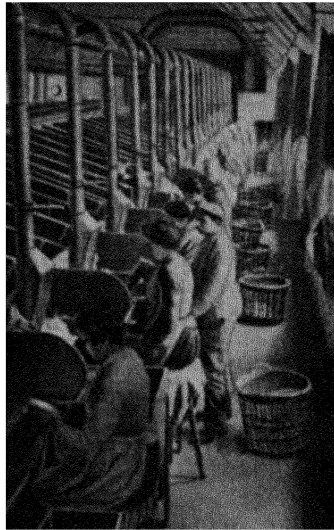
DUST REMOVAL PLANT. Rag-cutting room in a paper mill. Each operator works opposite an exhaust hood through which dust is drawn away. (Courtesy of Sturtevant Engineering Co., London).
